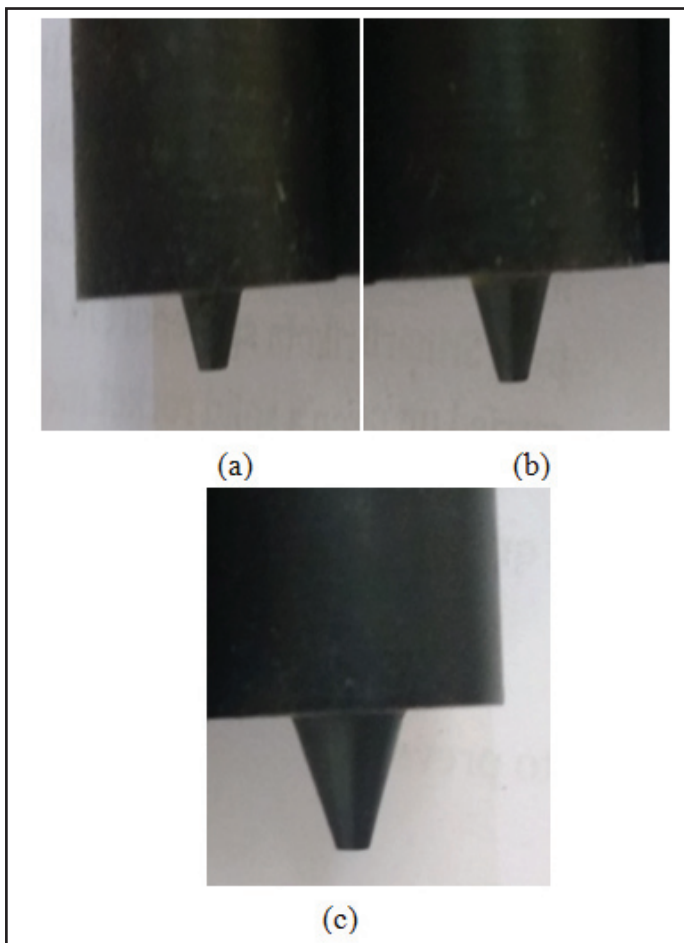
Three Different Pin Length of the Rotating Tool (a) 4mm (b) 6 mm (c) 8mm
